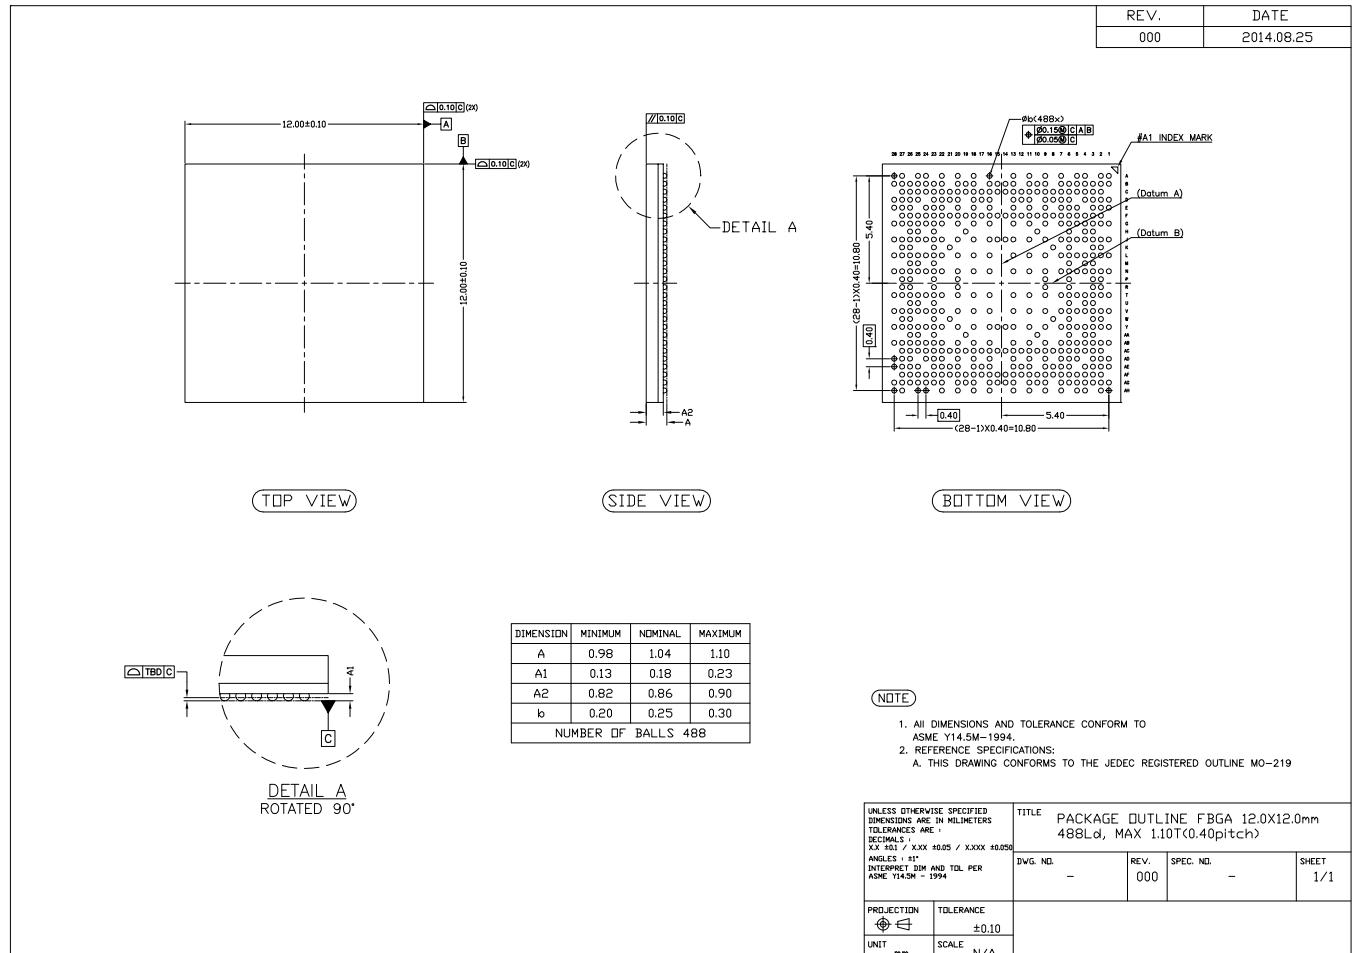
12 x 12 mm BGA, Case x Package Top, Bottom, and Side Views
